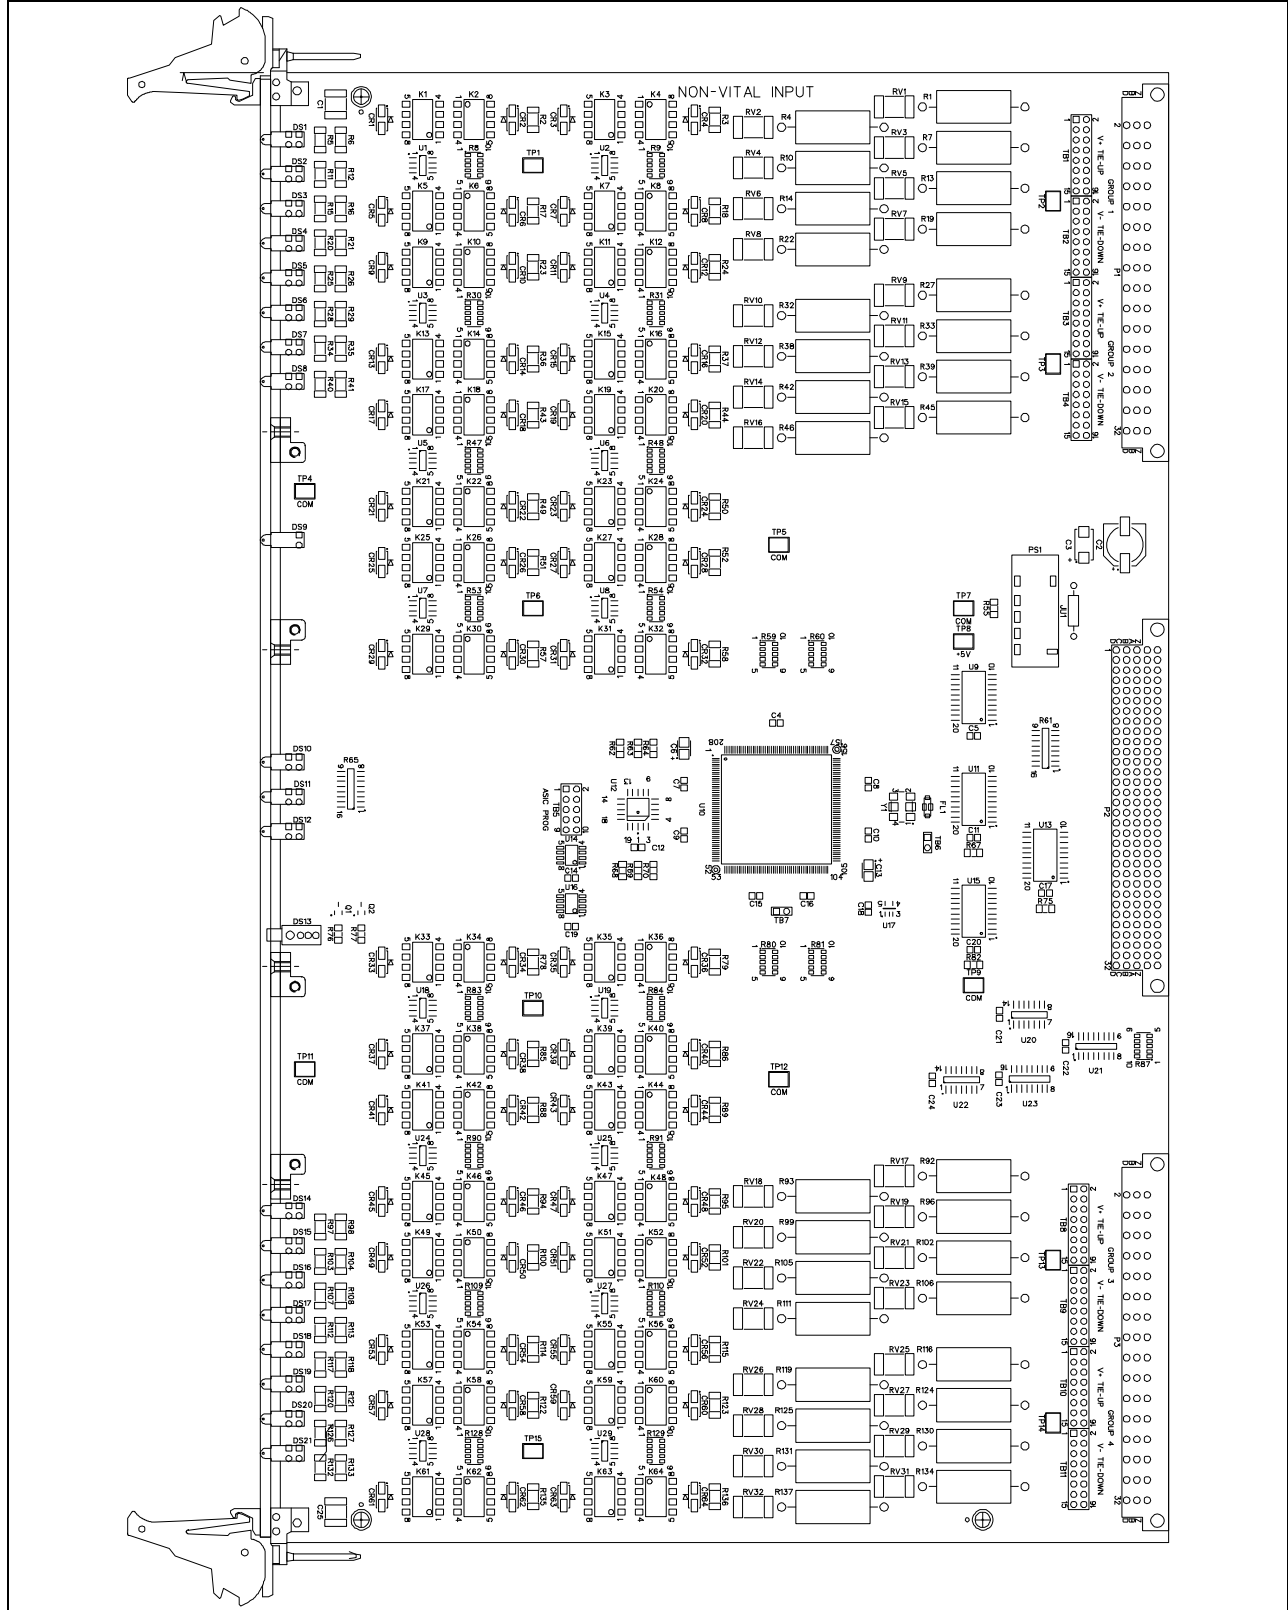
NVI Board, P/N 31166-457-01 and -02
